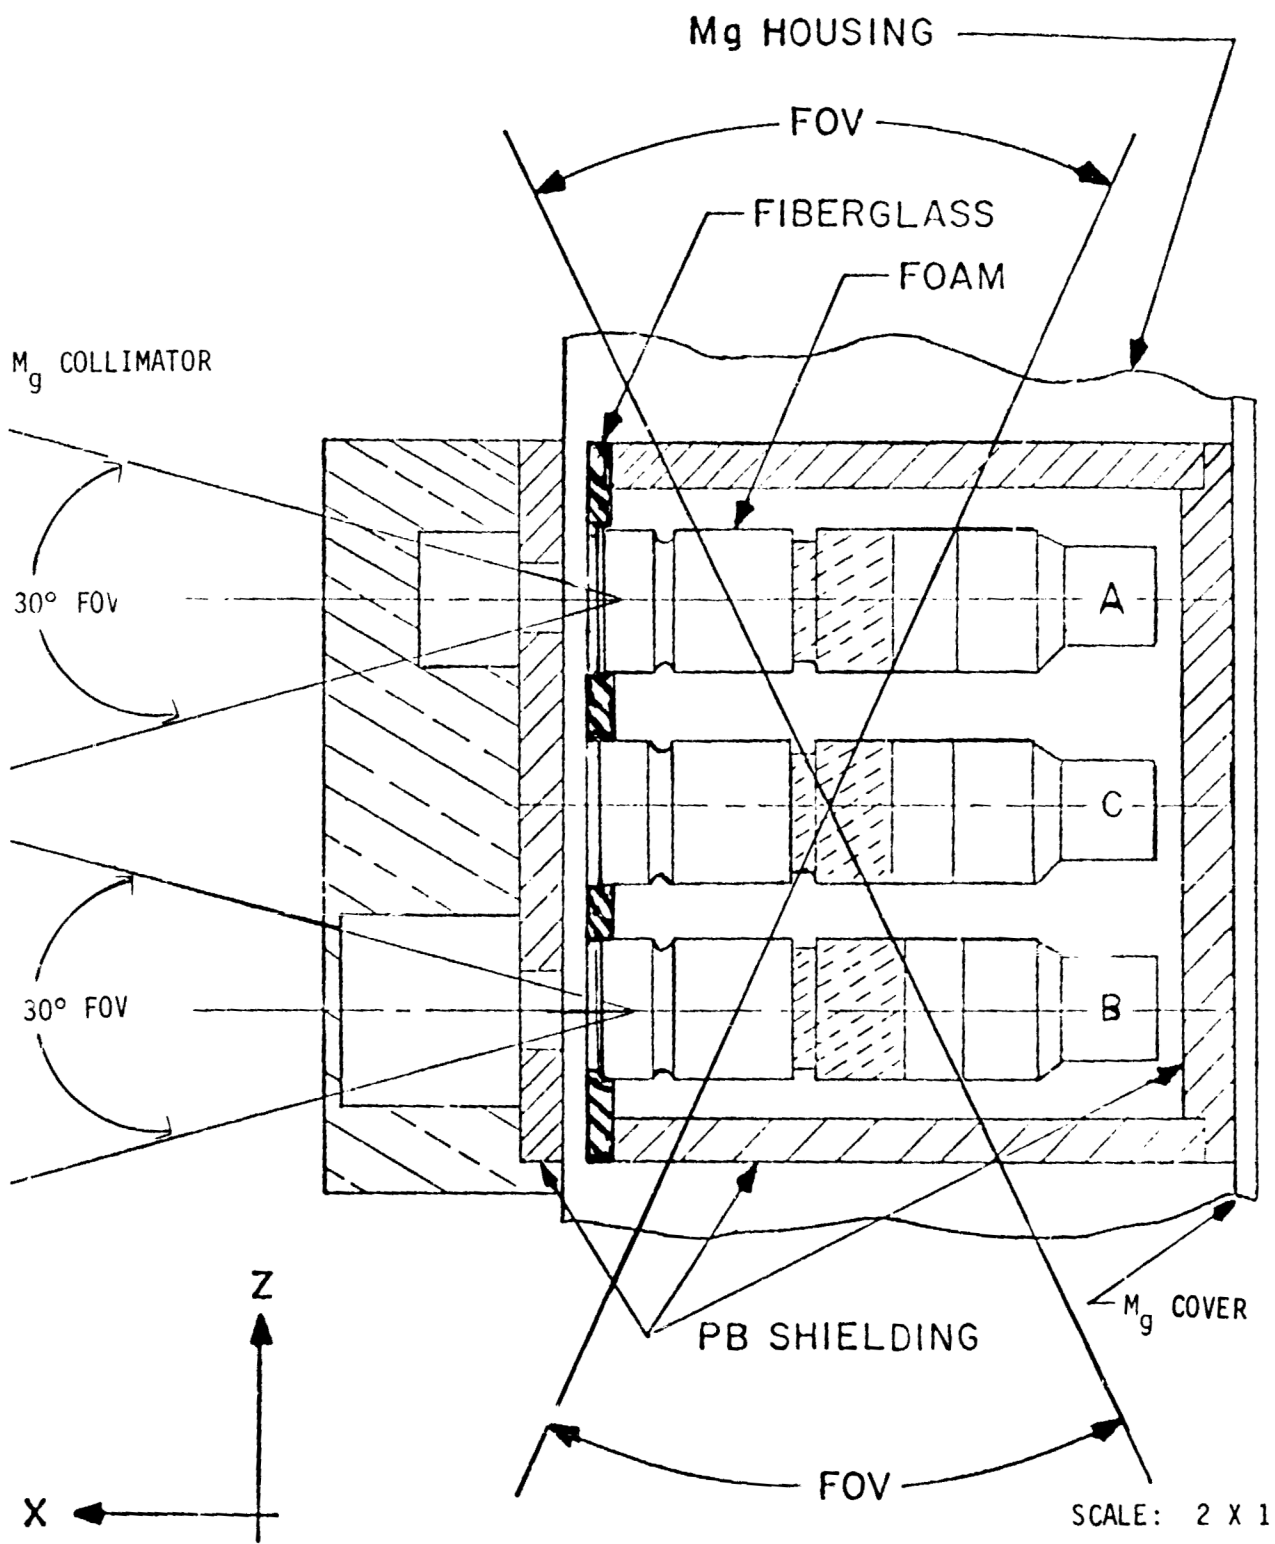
Geiger-Mueller Tube Telescope Assembly (Section)
